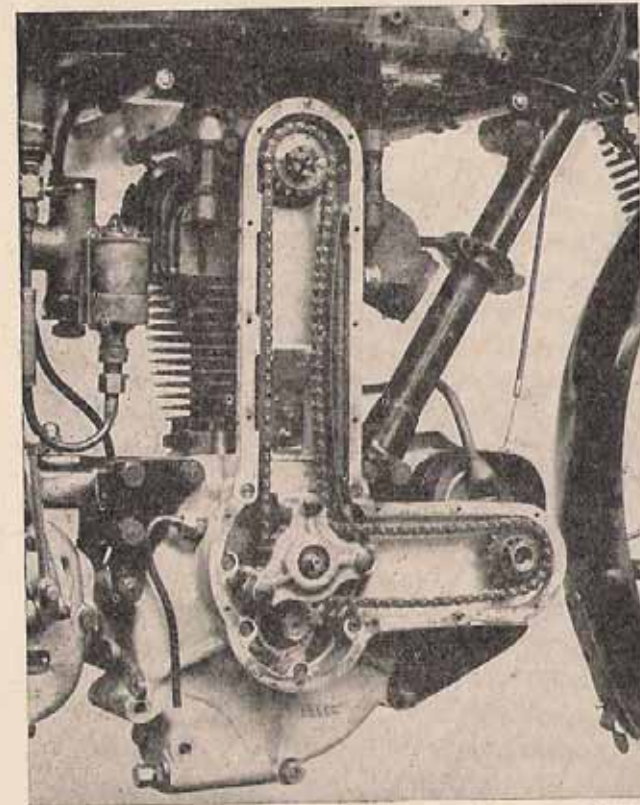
VIEW OF 4.98 H.P. OVERHEAD CAMSHAFT ENGINE. The timing case covers are removed to expose the chain drive to the camshaft and magneto and also the special tensioning device.
